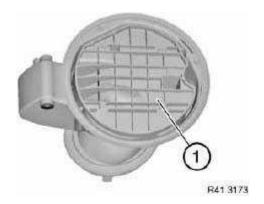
Identifying Cover Bowl Courtesy of BMW OF NORTH AMERICA, INC.
